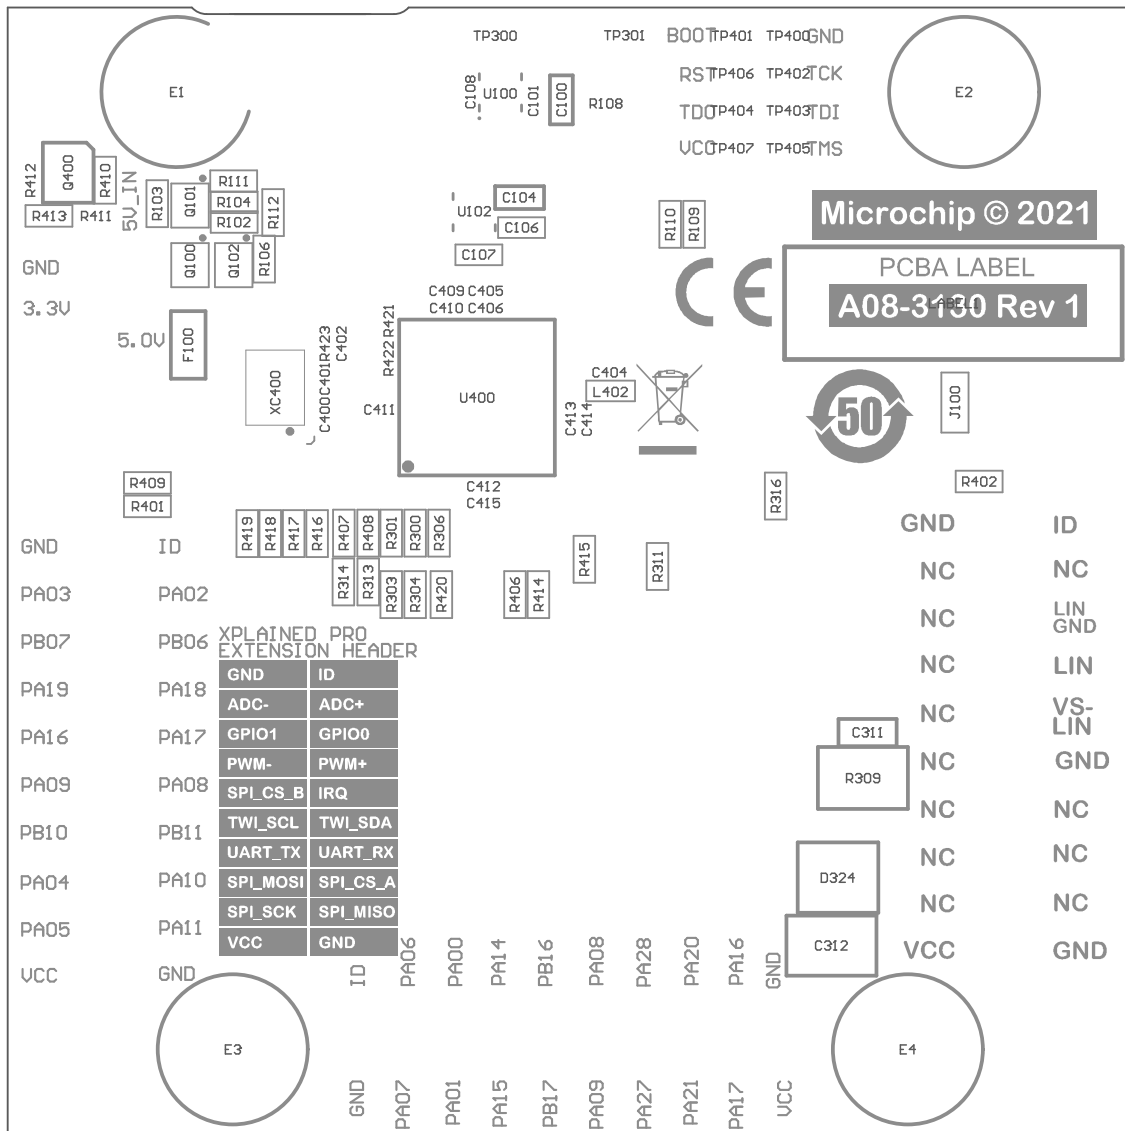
SAM HA1G17A Xplained Pro Assembly Drawing Bottom
